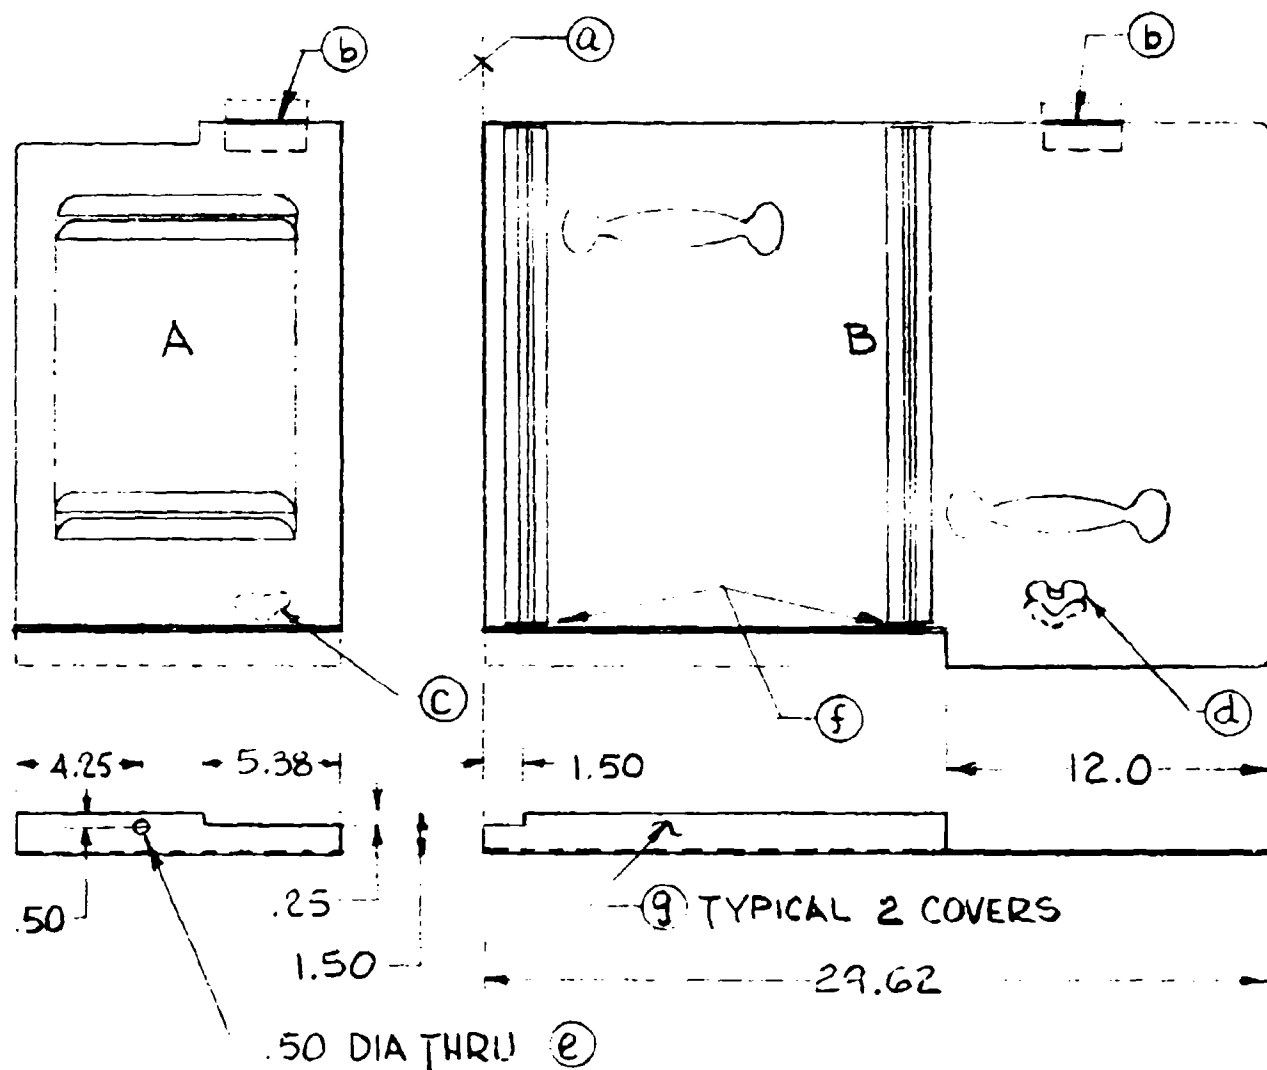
Left-Hand Subassembly Welded in Place
